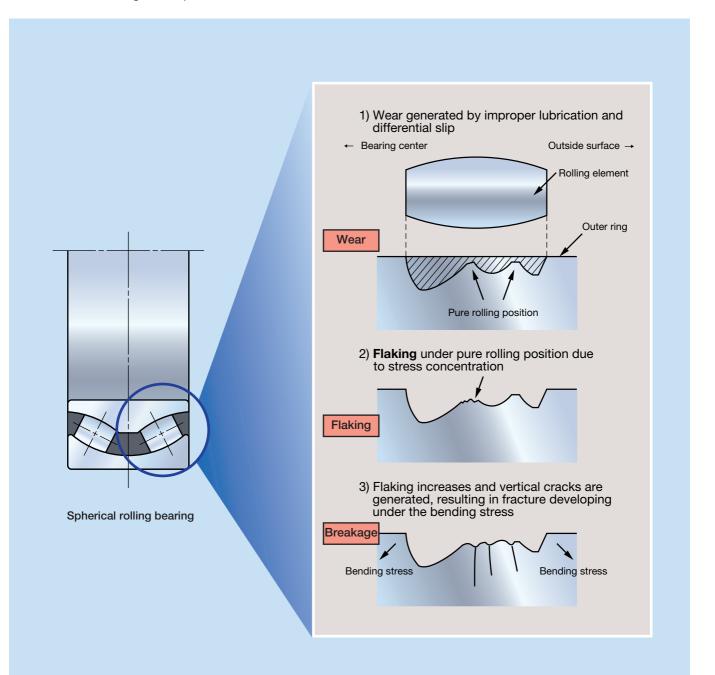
Failure mechanism of continuous casting guide roll bearings
